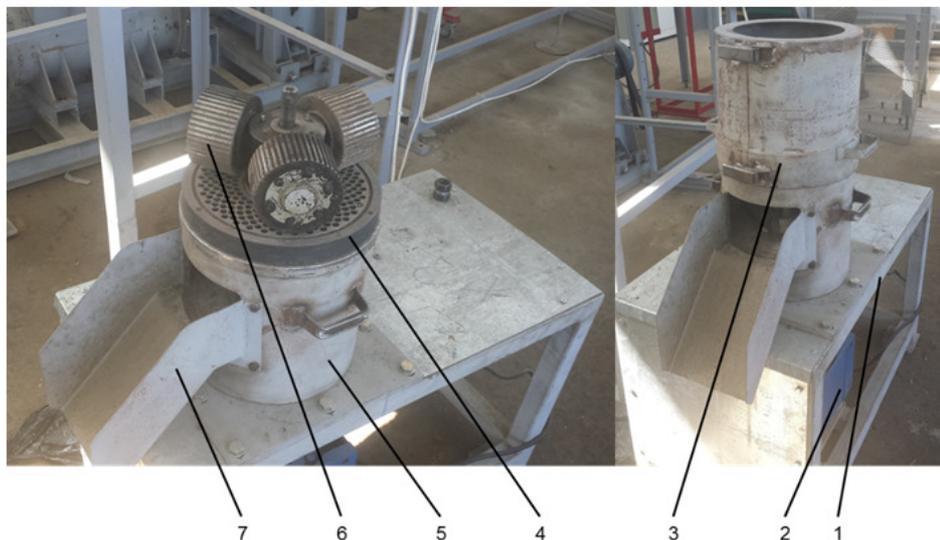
Flat die pelleting equipment: 1 – frame; 2 – electric motor; 3 – material inlet; 4 – flat die with orifices; 5 – casing; 6 – pressing rollers; 7 – pellet evacuating chute
